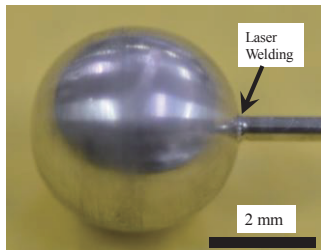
Platinum ball laser welded platinum pipe.
